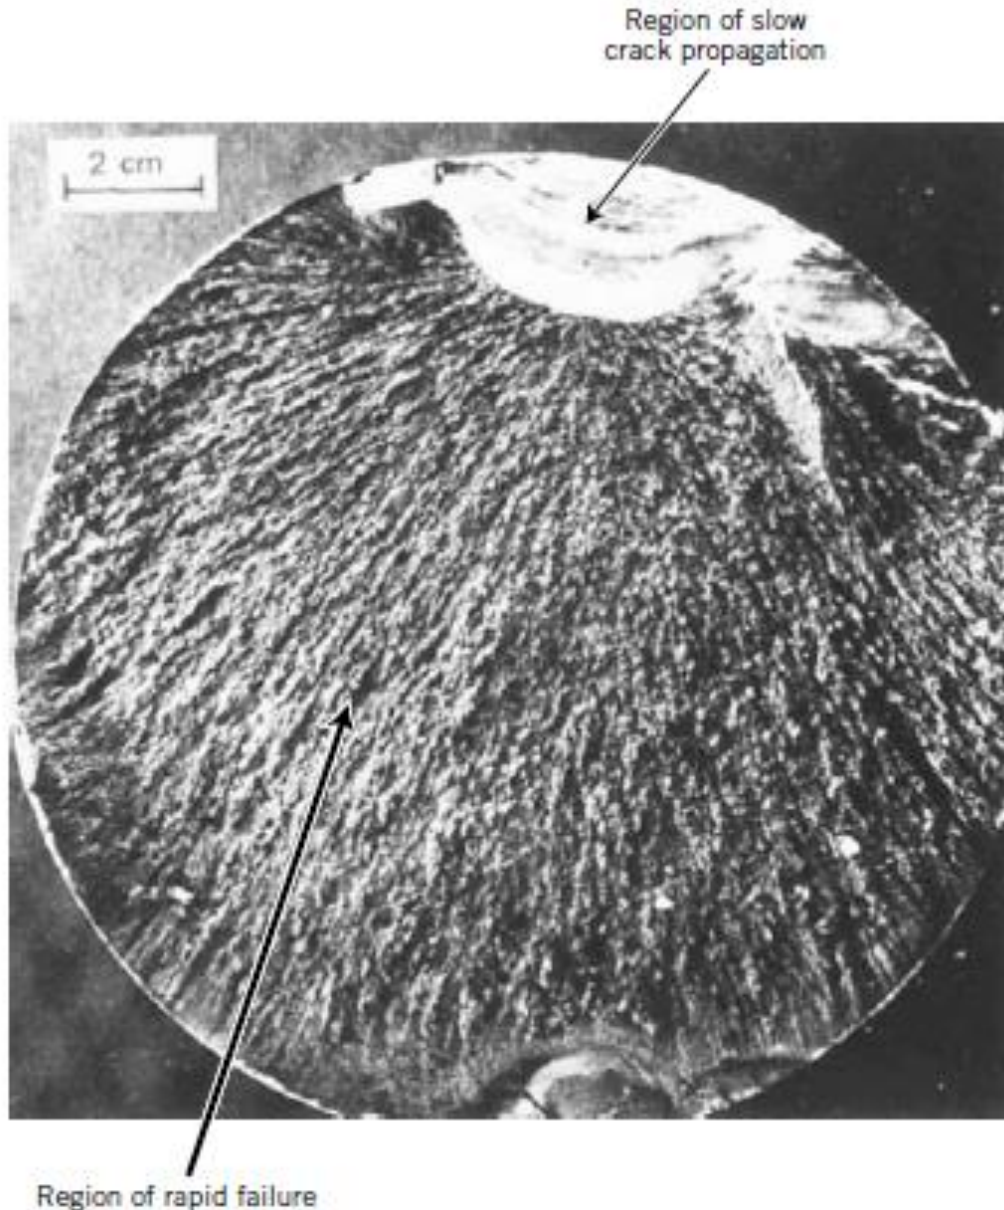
Fracture surface of a rotating steel shaft that experienced fatigue failure. Beachmark ridges are visible in the photograph.
